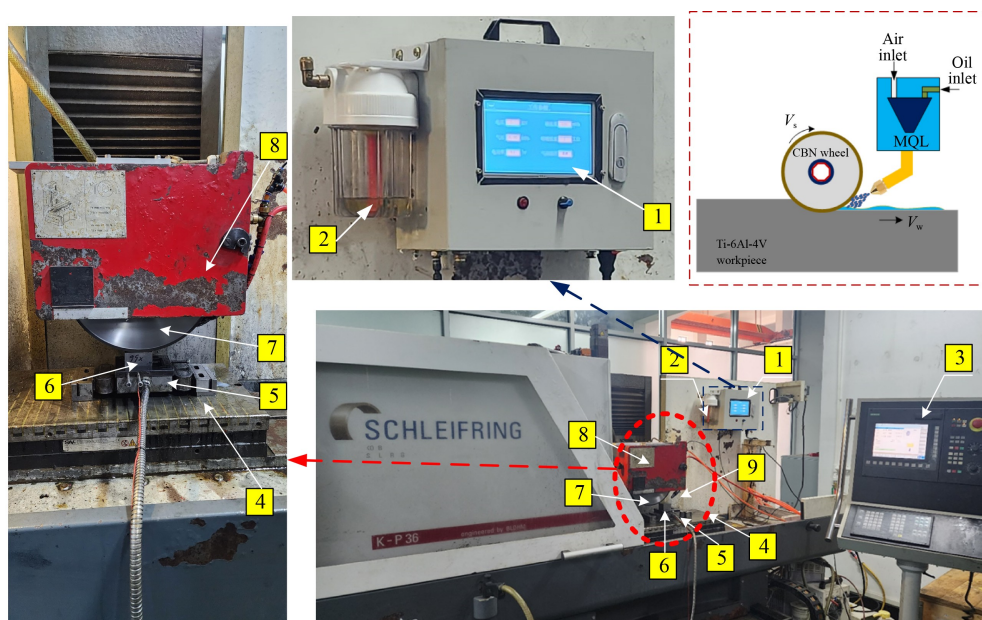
Grinding machine and MQL set-up. 1. MQL system; 2. MQL fluid tank; 3. CNC control panel; 4. Magnetic table; 5. Dynamometer; 6. TC4 workpiece; 7. CBN grinding wheel; 8. Hydraulic control; 9. MQL nozzle.
